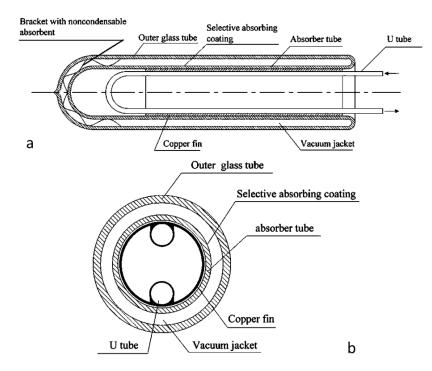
Evacuated Tube Collector a) Glass Evacuated Tube; b) Cross-section [11]
